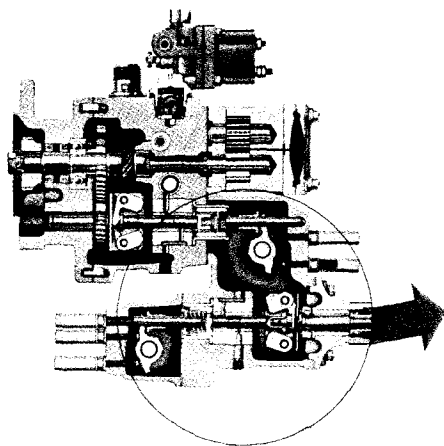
Cross-section torque converter governor and PT (type R) fuel pump
